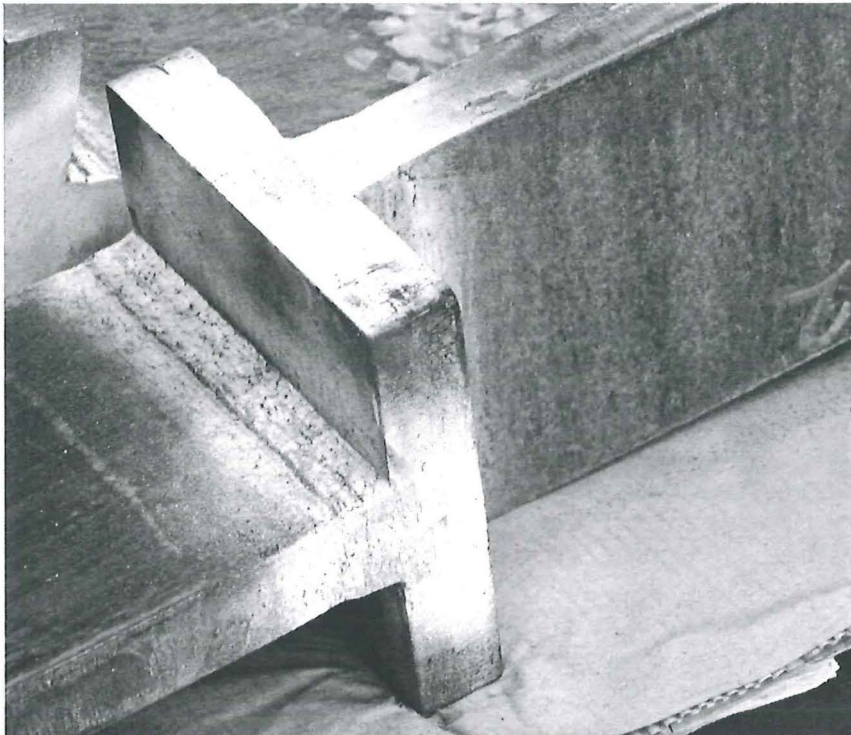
X-joint with load carrying full penetration welds with high SCF (Specimen type C)
